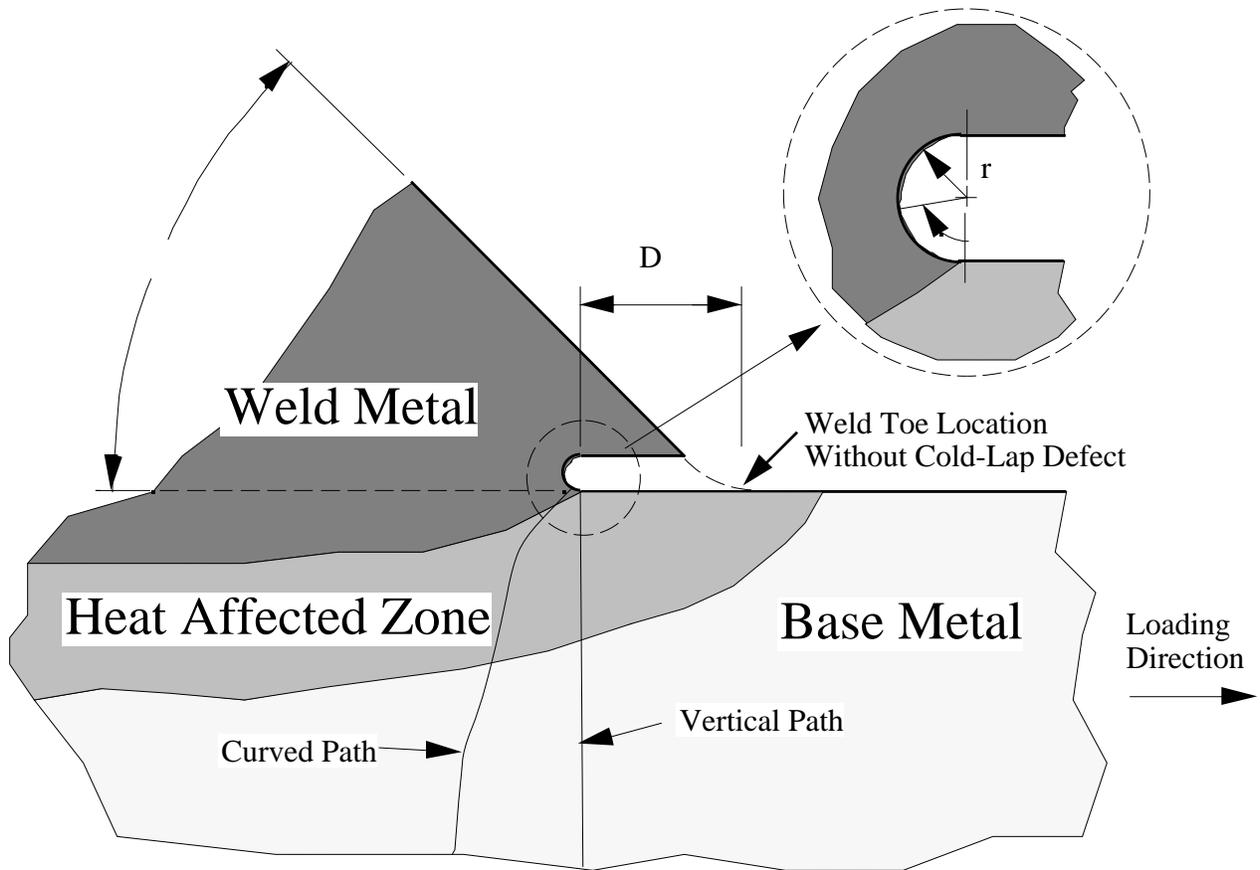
Two-dimensional model of a weld-toe cold-lap. The weld-toe flank-angle (θ), the cold-lap depth (D), the cold-lap root-radius (r) and the azimuth angle around the cold-lap root-radius (ϕ) are indicated.
